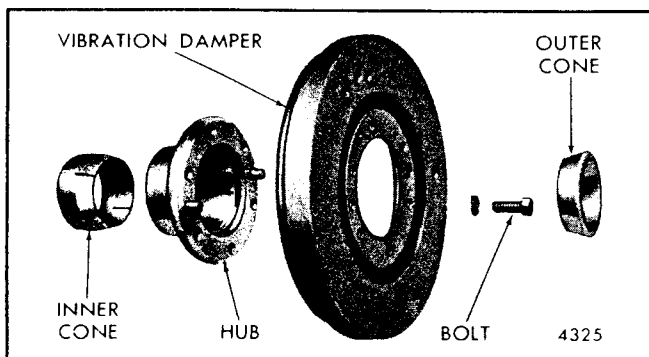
Vibration Damper Details and Relative Location of Parts
